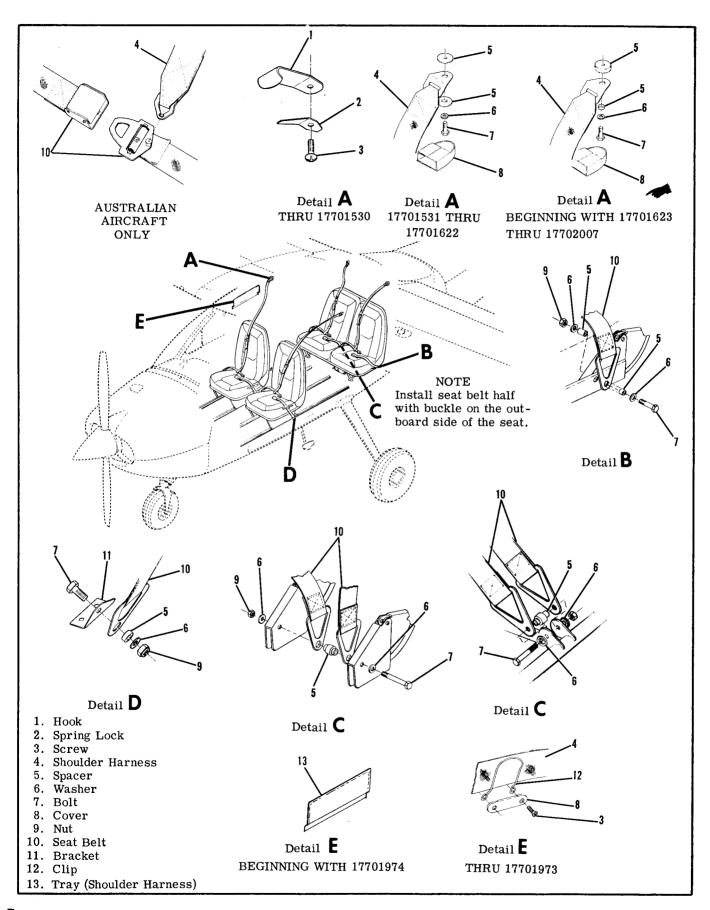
A. Seat Belt and Shoulder Harness Installation(Sheet 1 of 2)
